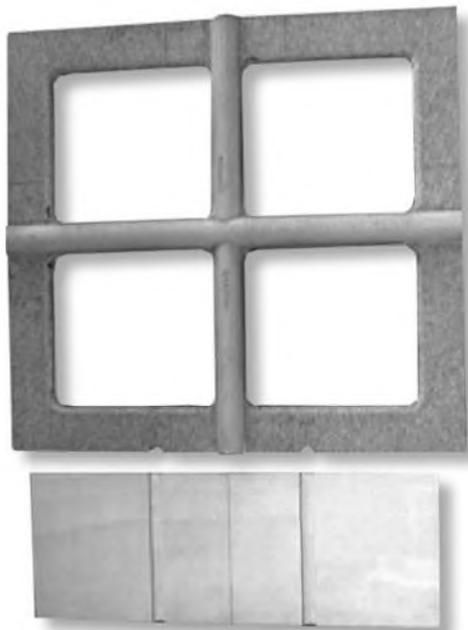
Front view of finished damping panel and bottom tunnel board.
